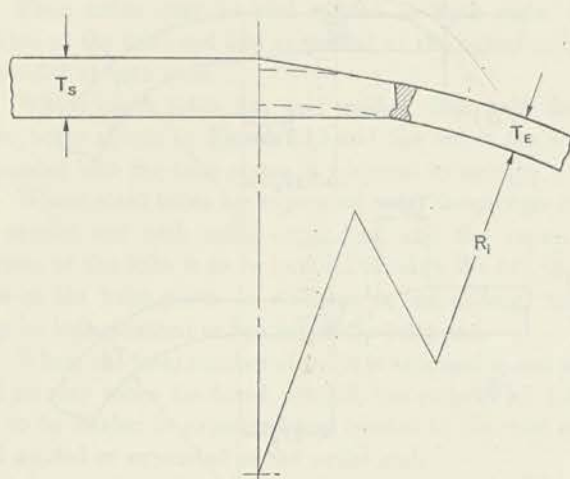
ATTACHMENT OF HEMISPHERICAL END TO CYLINDRICAL SHELL
